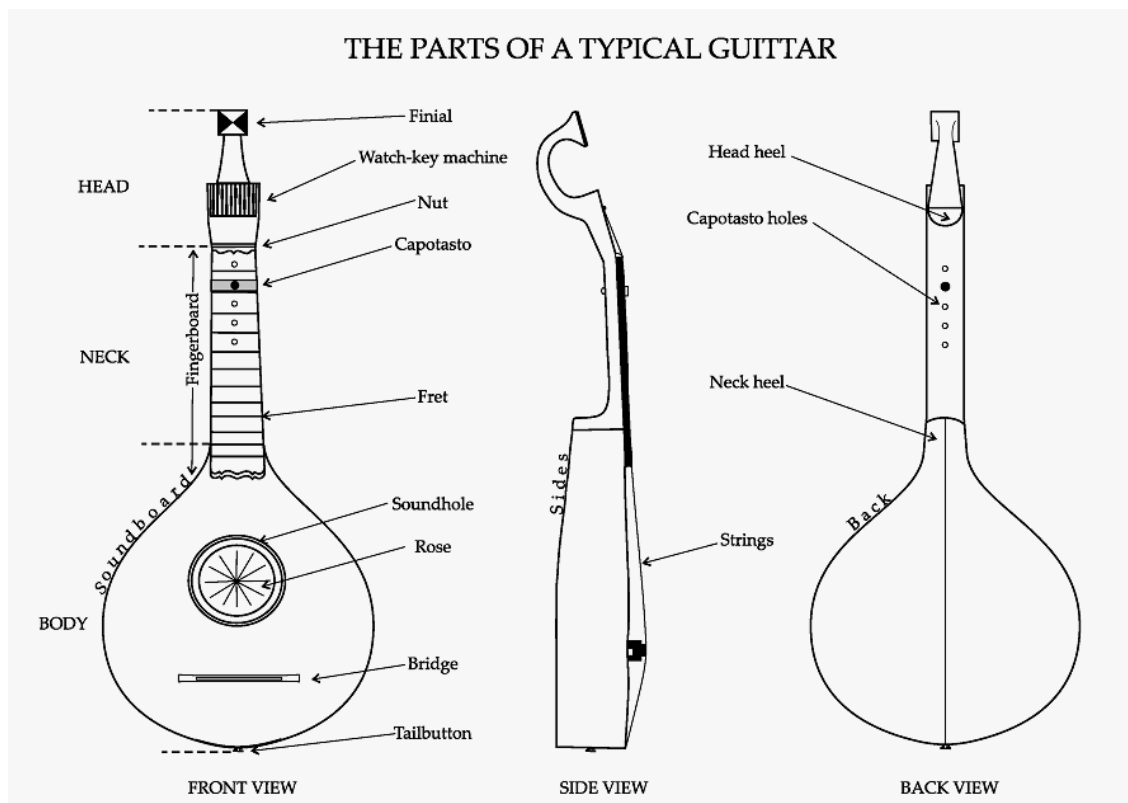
Technical drawing showing the terms used to describe the main parts on the front, sides and back of a typical guitar.
